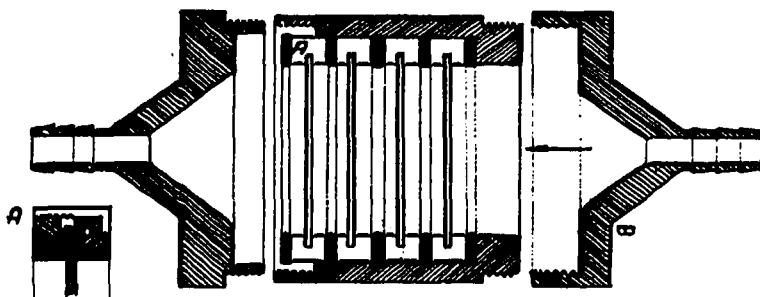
Holder with disposable aluminium frames for the filter paper discs.
